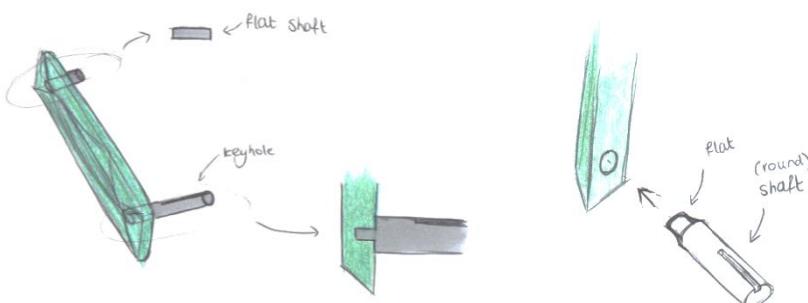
, ASSEMBLY SHAFT INTO HANDLE SIDE
